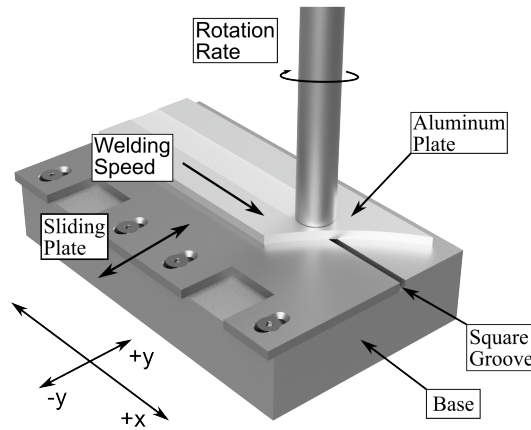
Square groove extrusion fixture utilized for this project. The fixture provides a 6.35mm (.250”) deep groove that is adjustable between 0mm and 6.35mm (.250”) in width.
